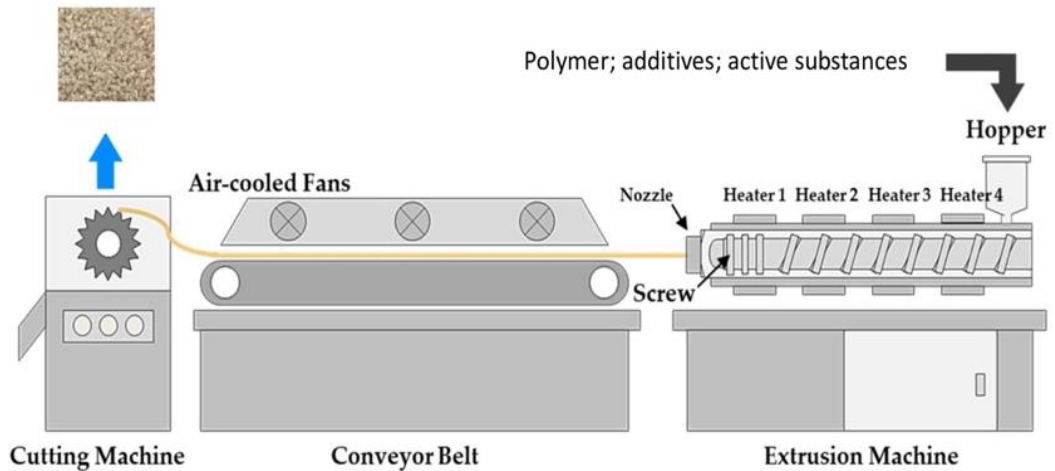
Compounding process divided in extrusion machine, conveyor belt, cutting machine.
